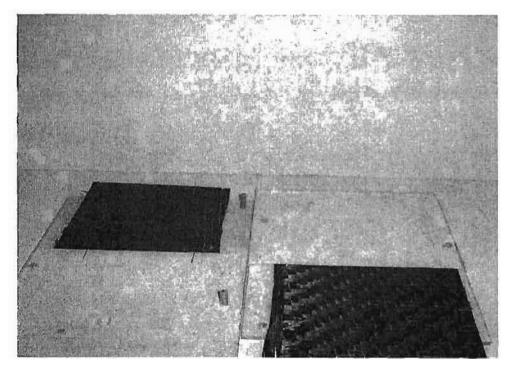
Fixtured lap shear test specimens just prior to bonding.
